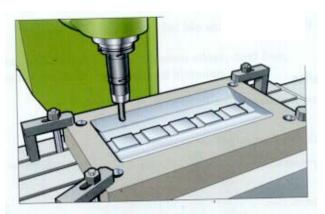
Mounting of job on the bed by clamping in CNC milling machine.
